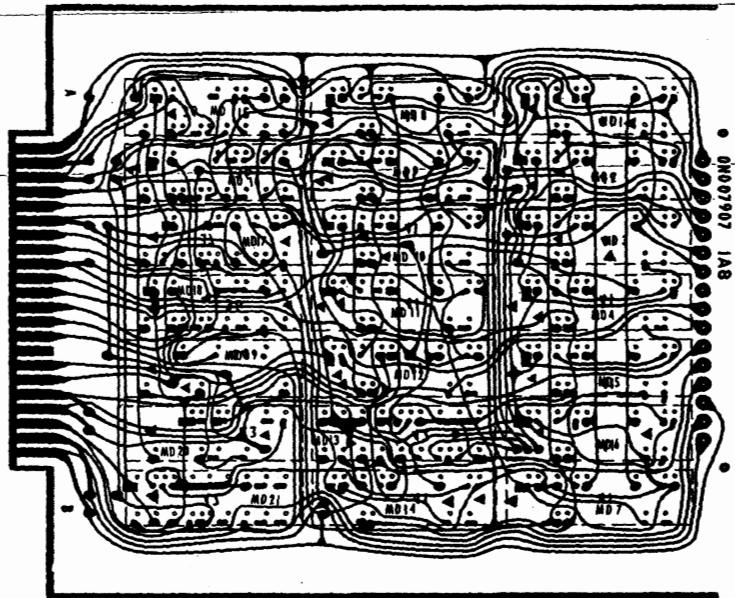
Card E-AJP Printed-Circuit Layout.
